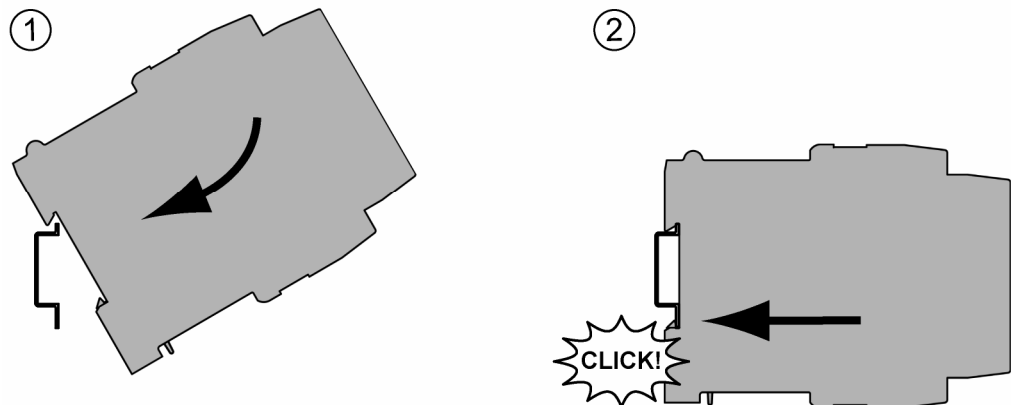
Mounting the IGW/900 on a DIN-rail
